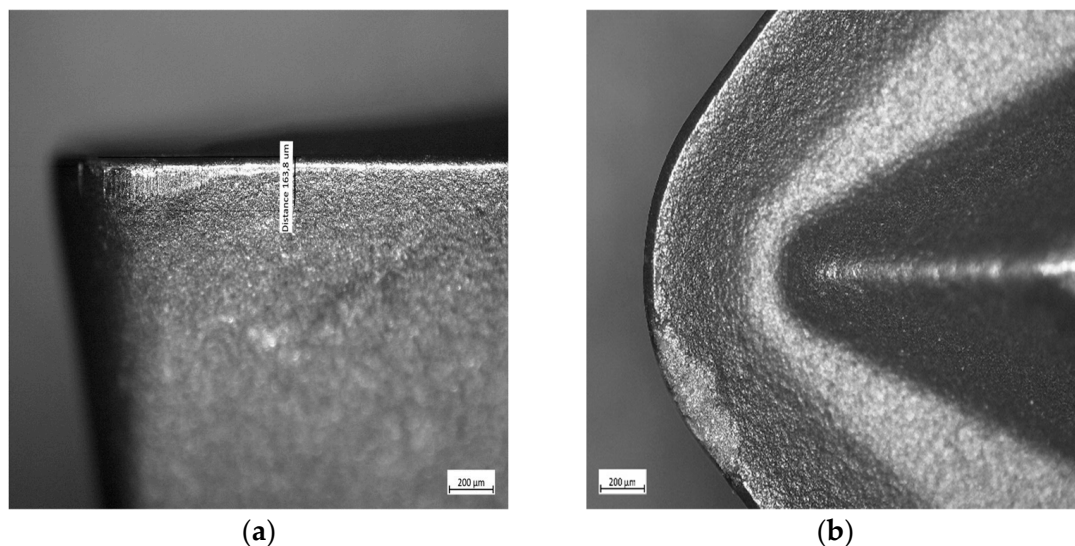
(a) Cutting insert wear, VB_B —flank wear 163.8 μm; (b) another view from face part of the damage on cutting insert.
